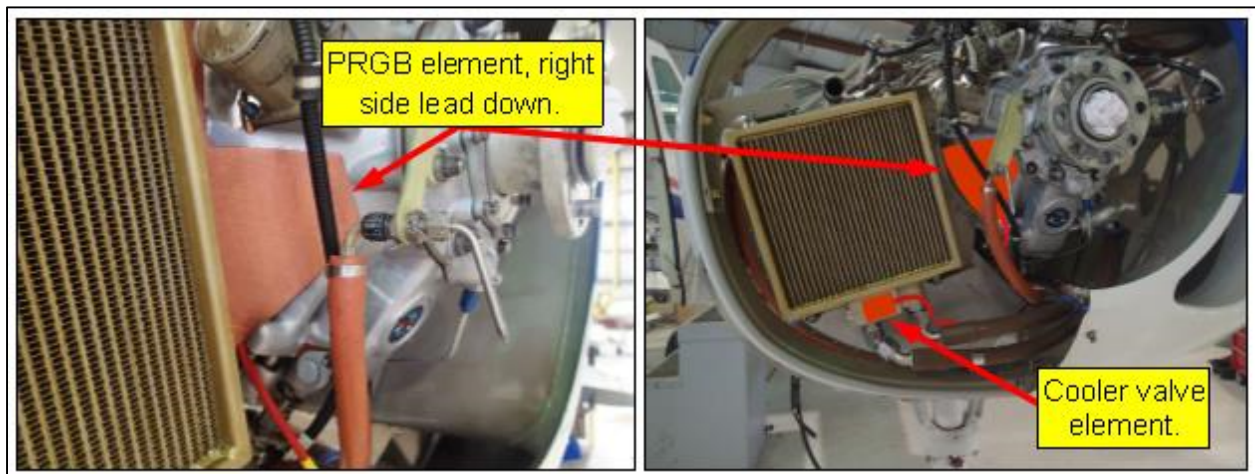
TEP3035- Right forward side of PRGB conical. TEP2673- Forward surface of oil cooler vernatherm valve housing.
